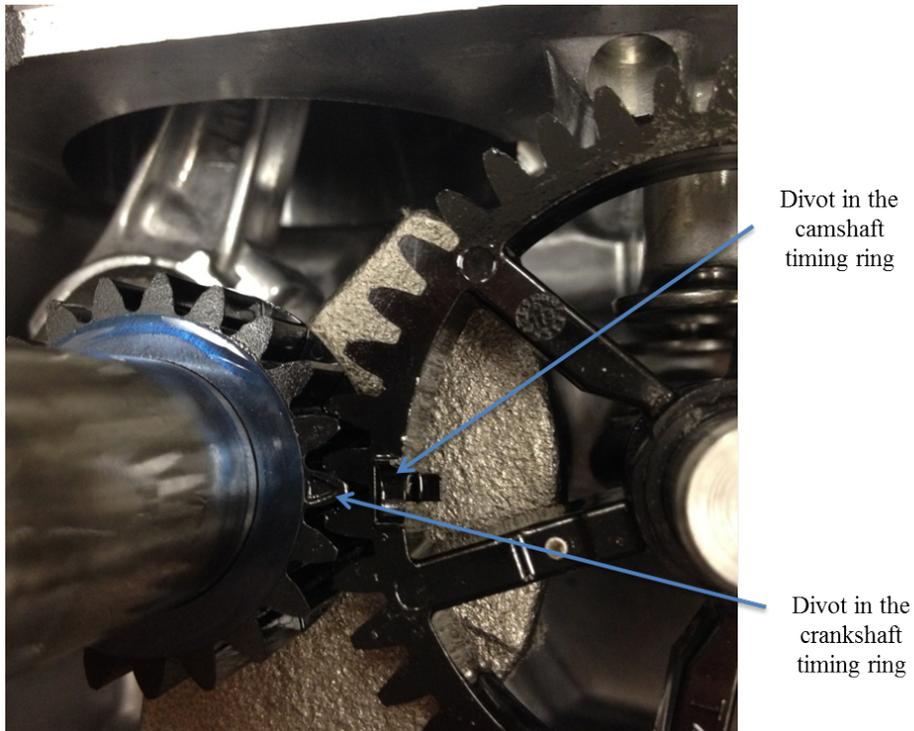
crankshaft timing ring aligned with camshaft timing ring
